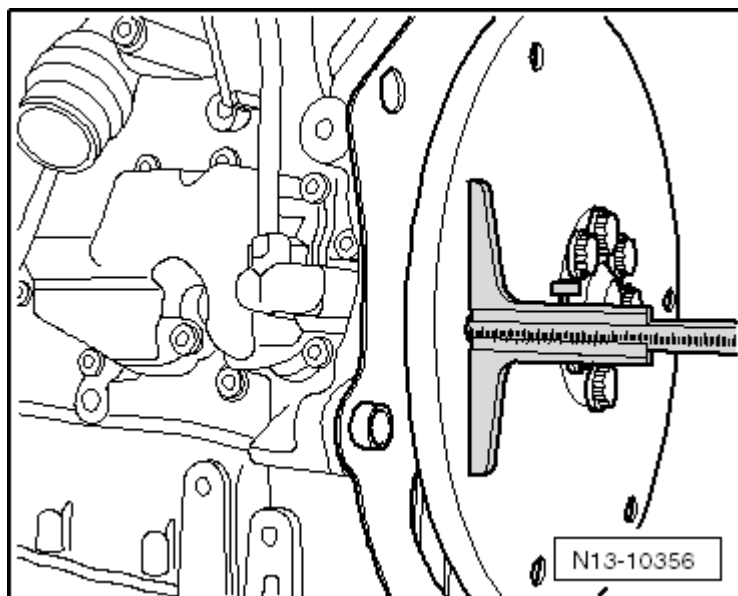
Identifying Dimension Between Drive Plate And Cylinder Block
